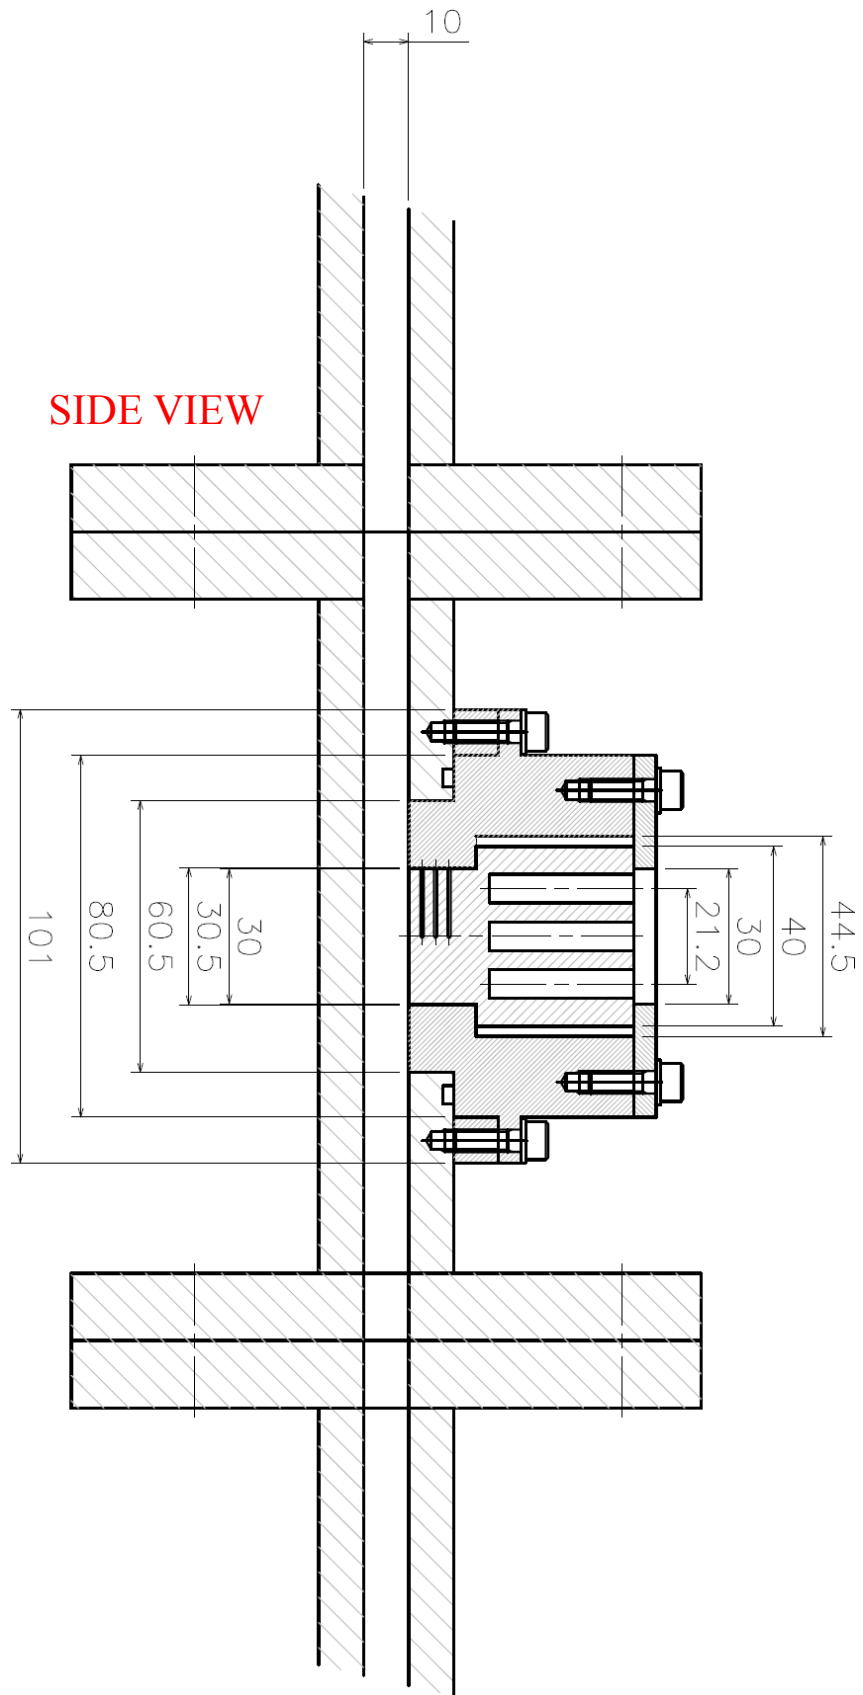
Side view of the test section design used in the new facility (dimensions in mm).
